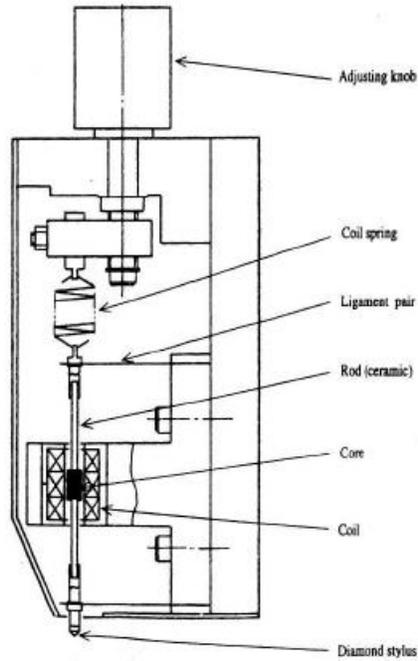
Surfcoorder ET (Kosaka Laboratory Ltd). Stylus—transducer assembly, showing stylus support mechanism.
